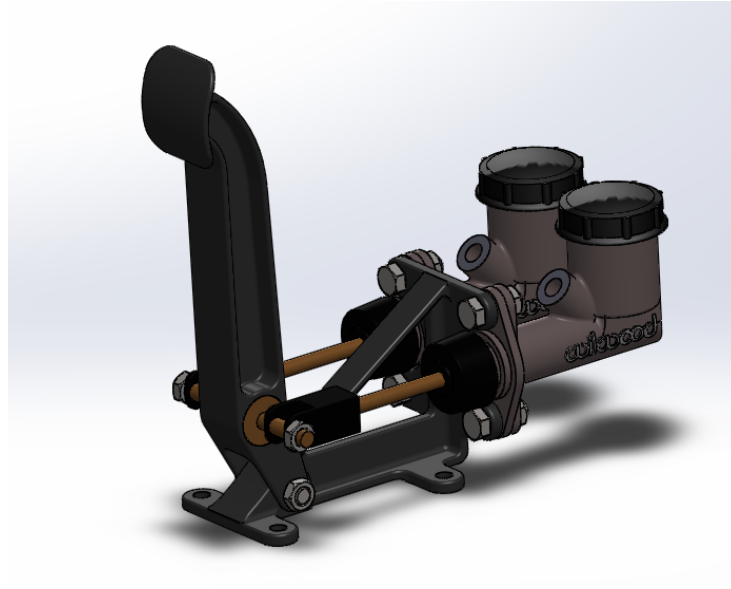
Solidworks Model of Pedal and Master Cylinder Assembly
